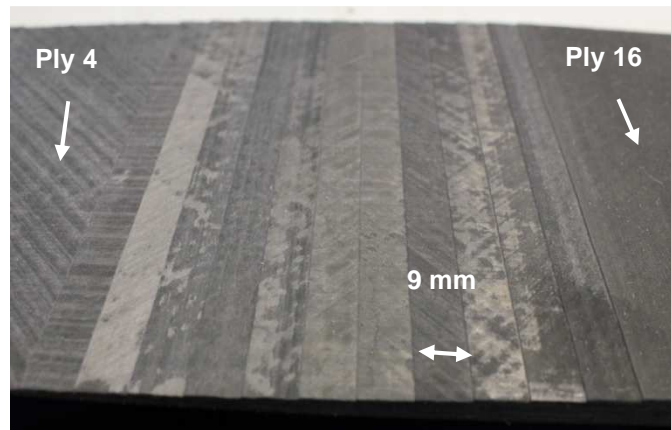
Steps machined with Abrasive Water-Jet Milling.
